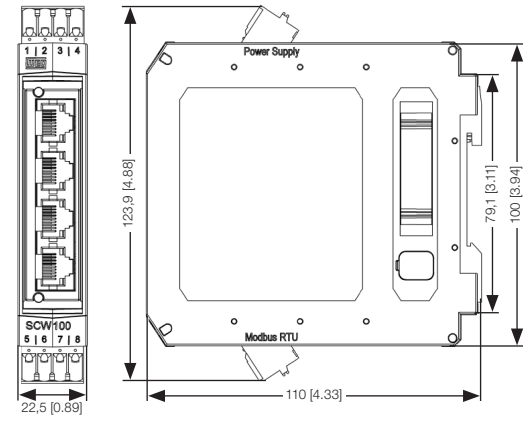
Starter Manager (SM) dimensions in mm [in]
